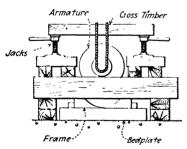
Showing a method of lowering or raising a rotor with jackscrews.
